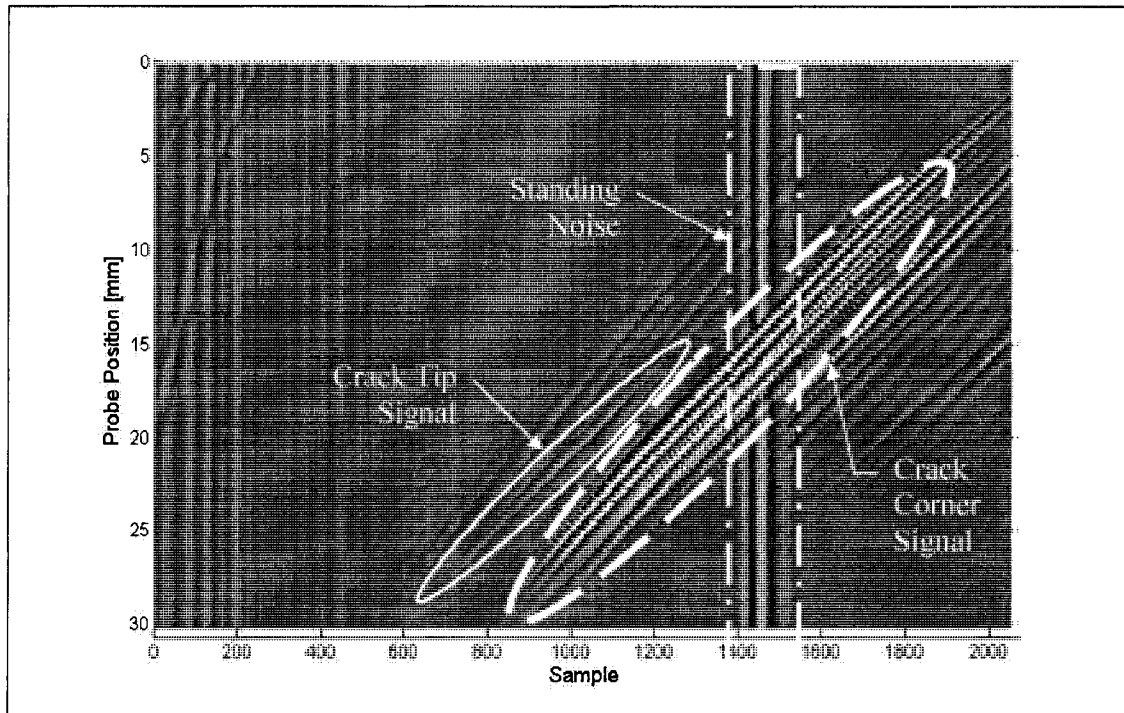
B-scans of specimen CO1 at 105% crack opening load
